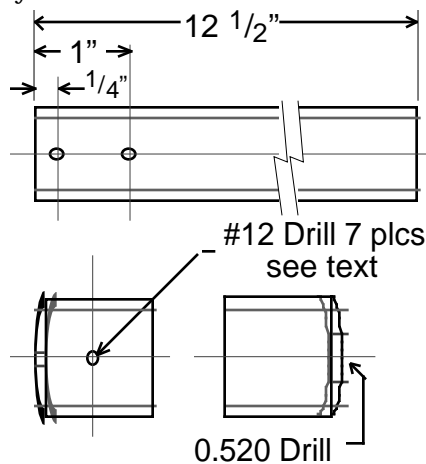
Drill dimensions for PVC pipe and end caps for enclosure.
